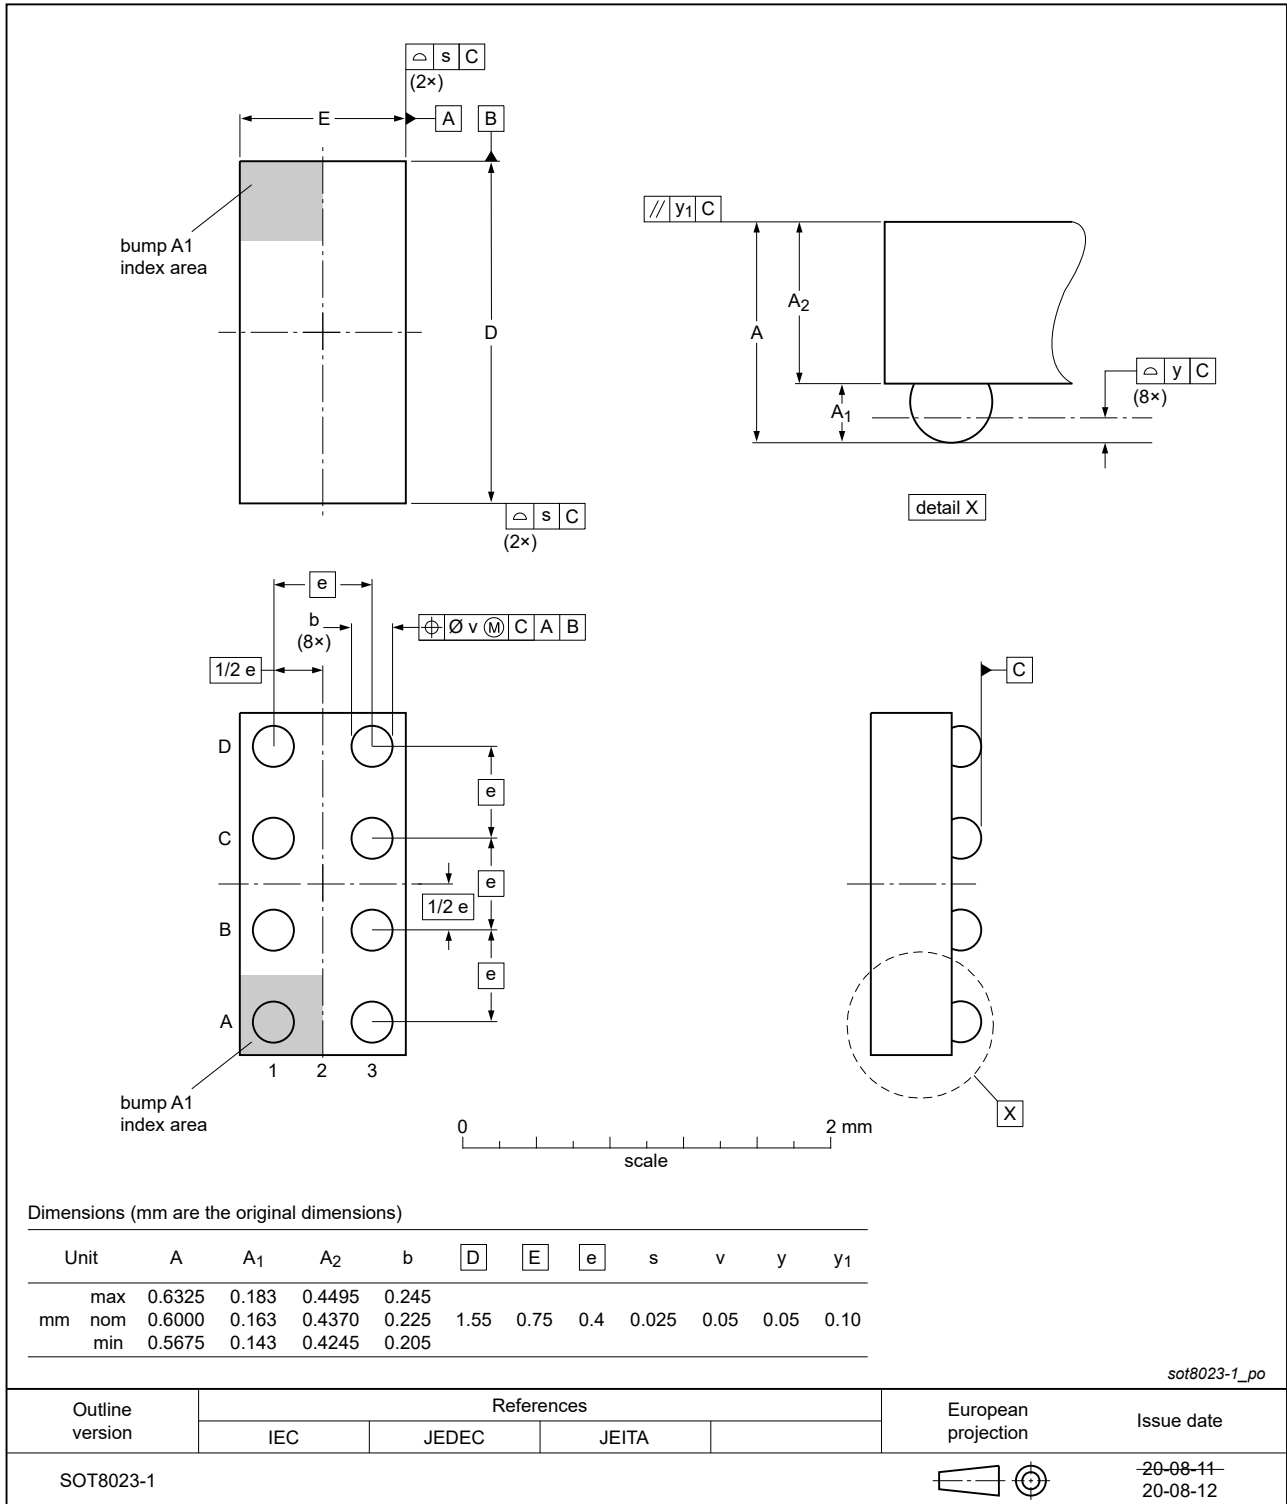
Package outline SOT8023-1 (WL CSP8)
